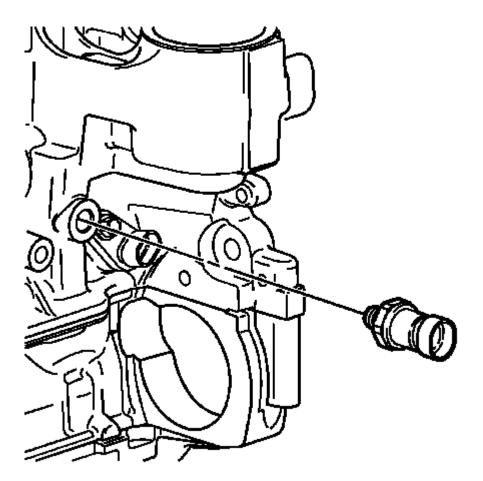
View Of Crankshaft Position Sensor Courtesy of GENERAL MOTORS CORP.
